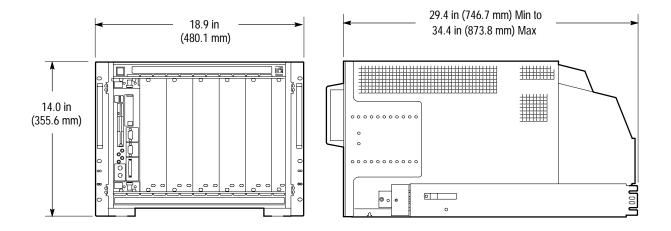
Front view and side view of Benchtop Chassis with Rackmount Option
